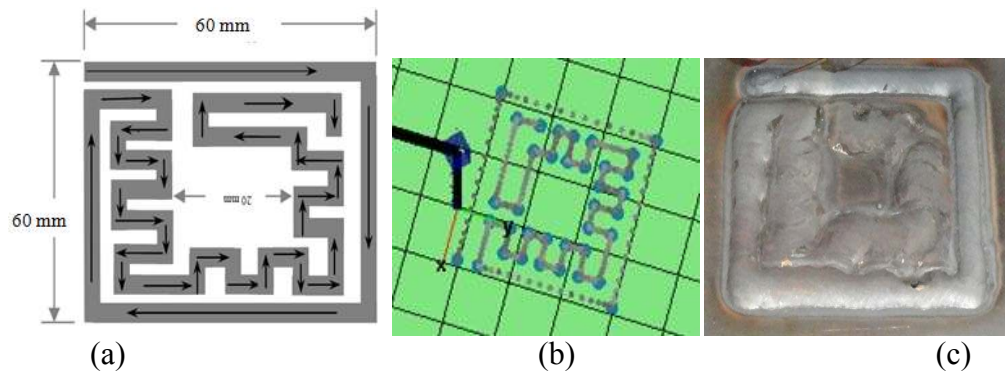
24. Deposition of hollow filling rectangular part, (a) contour and zigzag/raster path pattern; (b) the CAD drawing and (c) single deposited layer using the TW-SMD method
